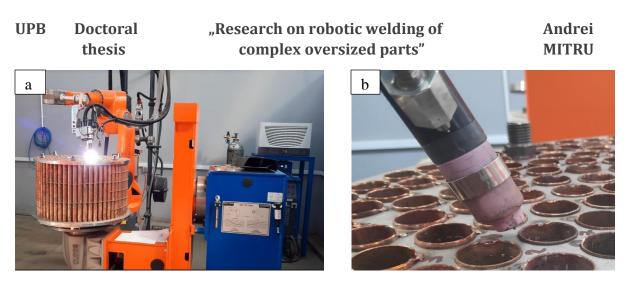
Robotic welding workstation (a) and positioning of the welding gun for performing the operation of tack welding (b)
